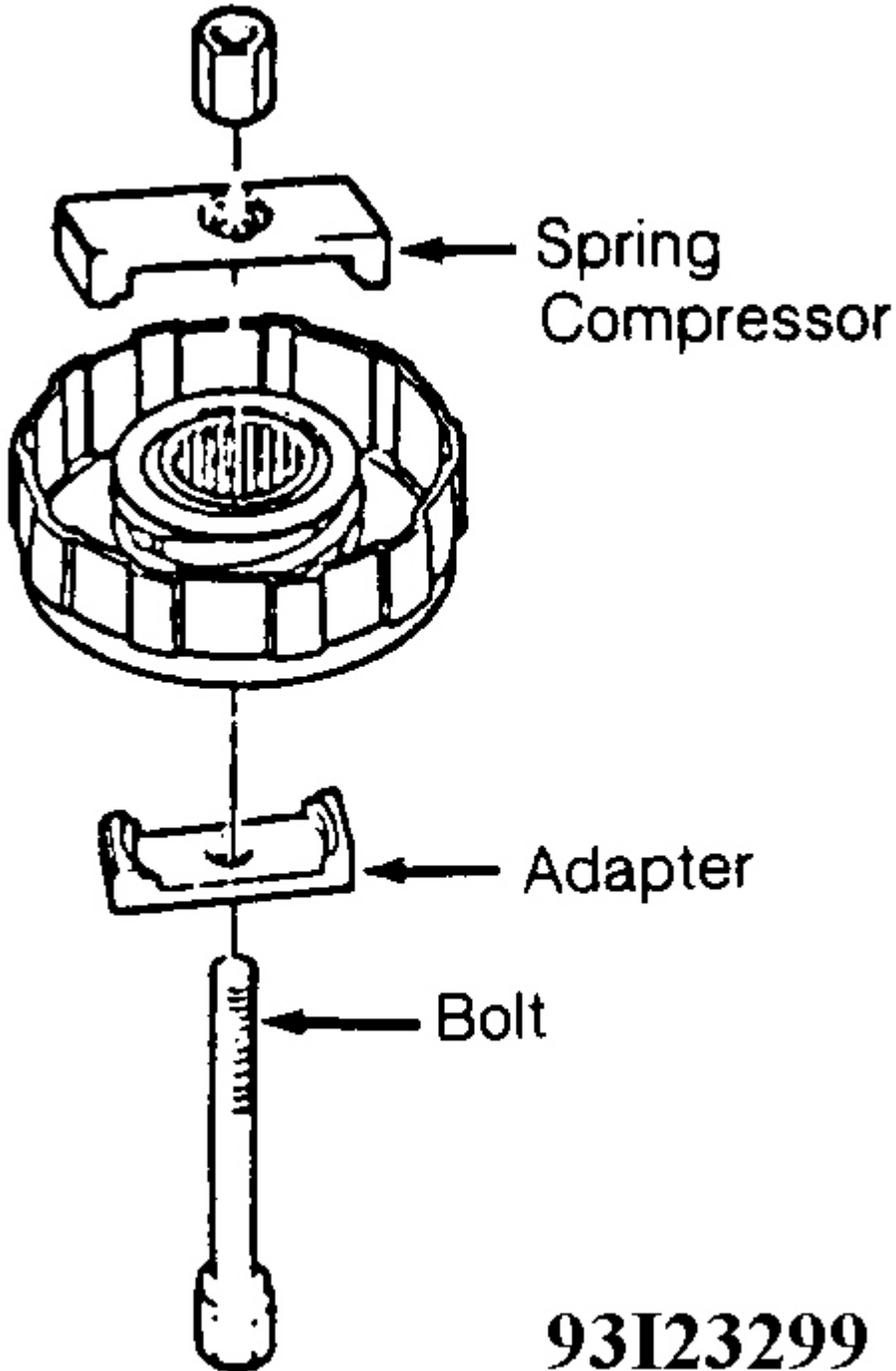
Compressing Return Spring (1st Clutch Shown; Others Similar)
